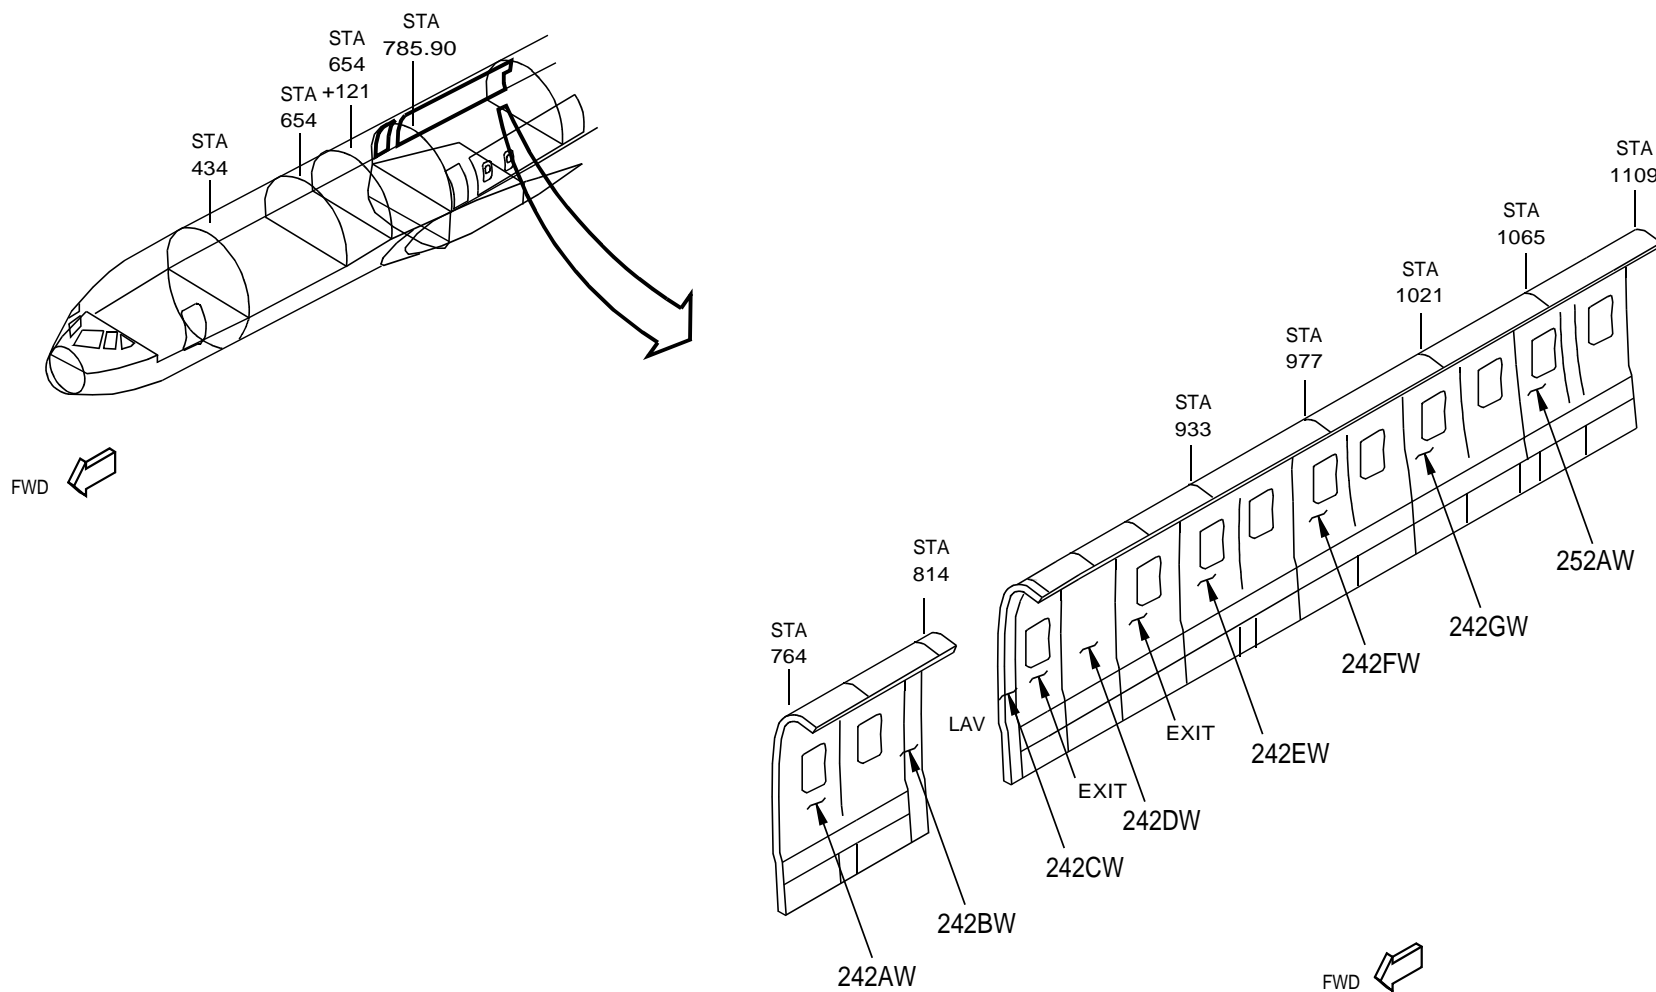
SUB-MAJOR ZONE 242/252 PASSENGER CABIN SIDEWALL PANELS - RIGHT
